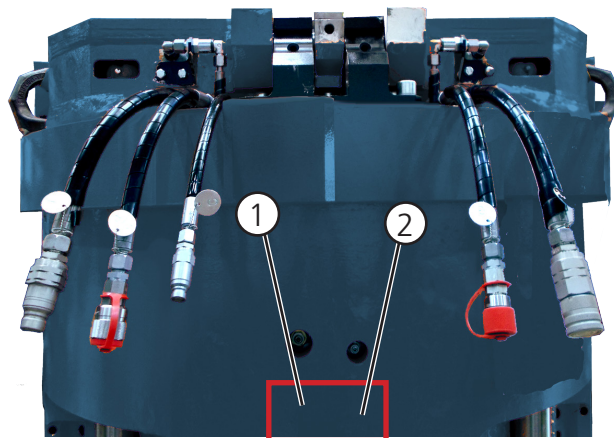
Position Anti-lowering Valve and Sequence Valve on Side of Body
